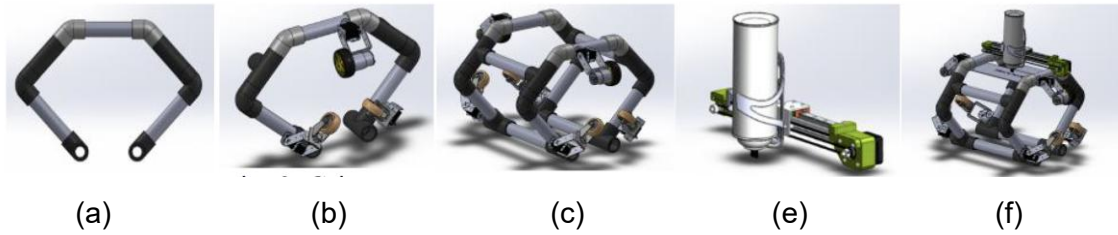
Construction of the robot showing different components (a) Main Frame (b) Gripper (c) Chassis (d) Printing Head (e) Fully Assembled
